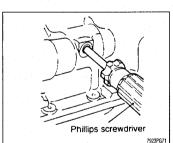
Holding the silent shaft for oil pump gear removal—2.0L engine
